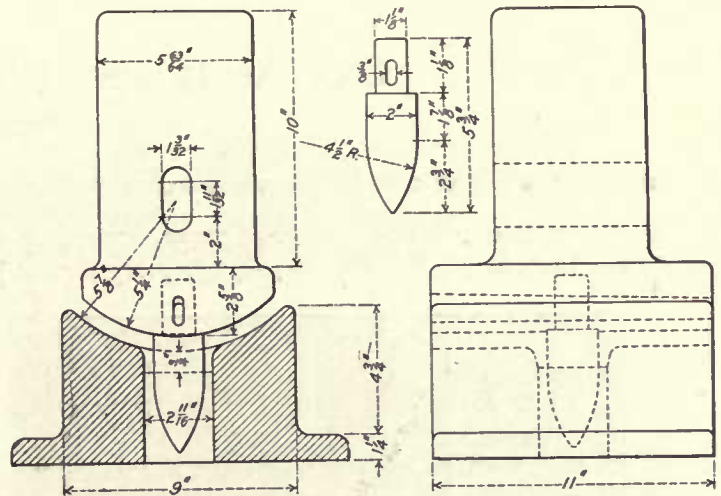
Dies for Forming Corner Patch for Washout Plug.
